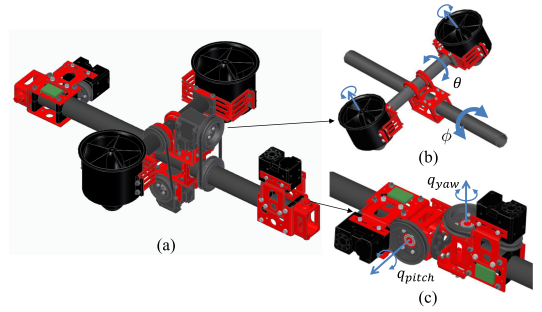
Mechanical design. (a) Link unit. (b) Dual-rotor gimbal module. (c) Two-DoF joint module.
